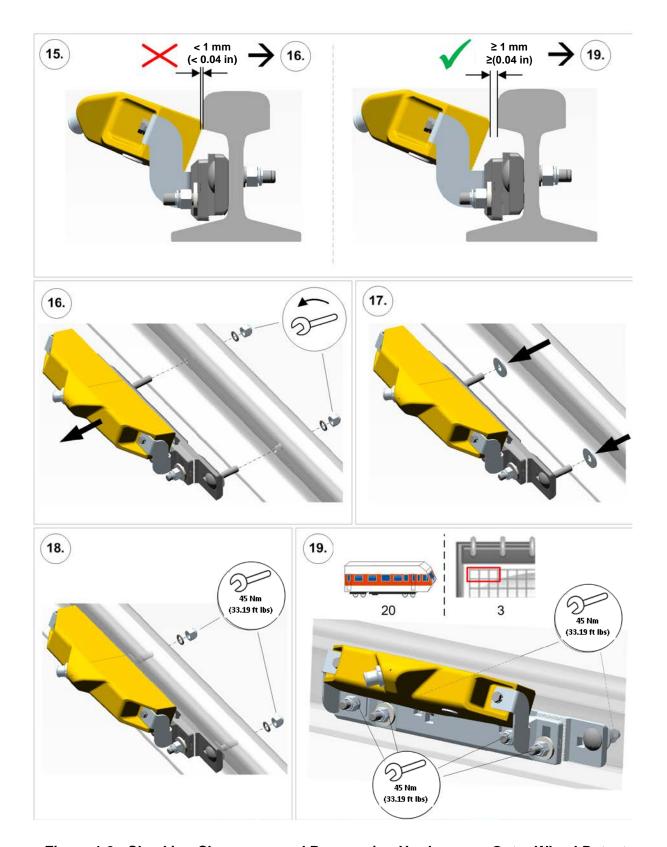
Checking Clearances and Re-securing Hardware on Outer Wheel Detector
